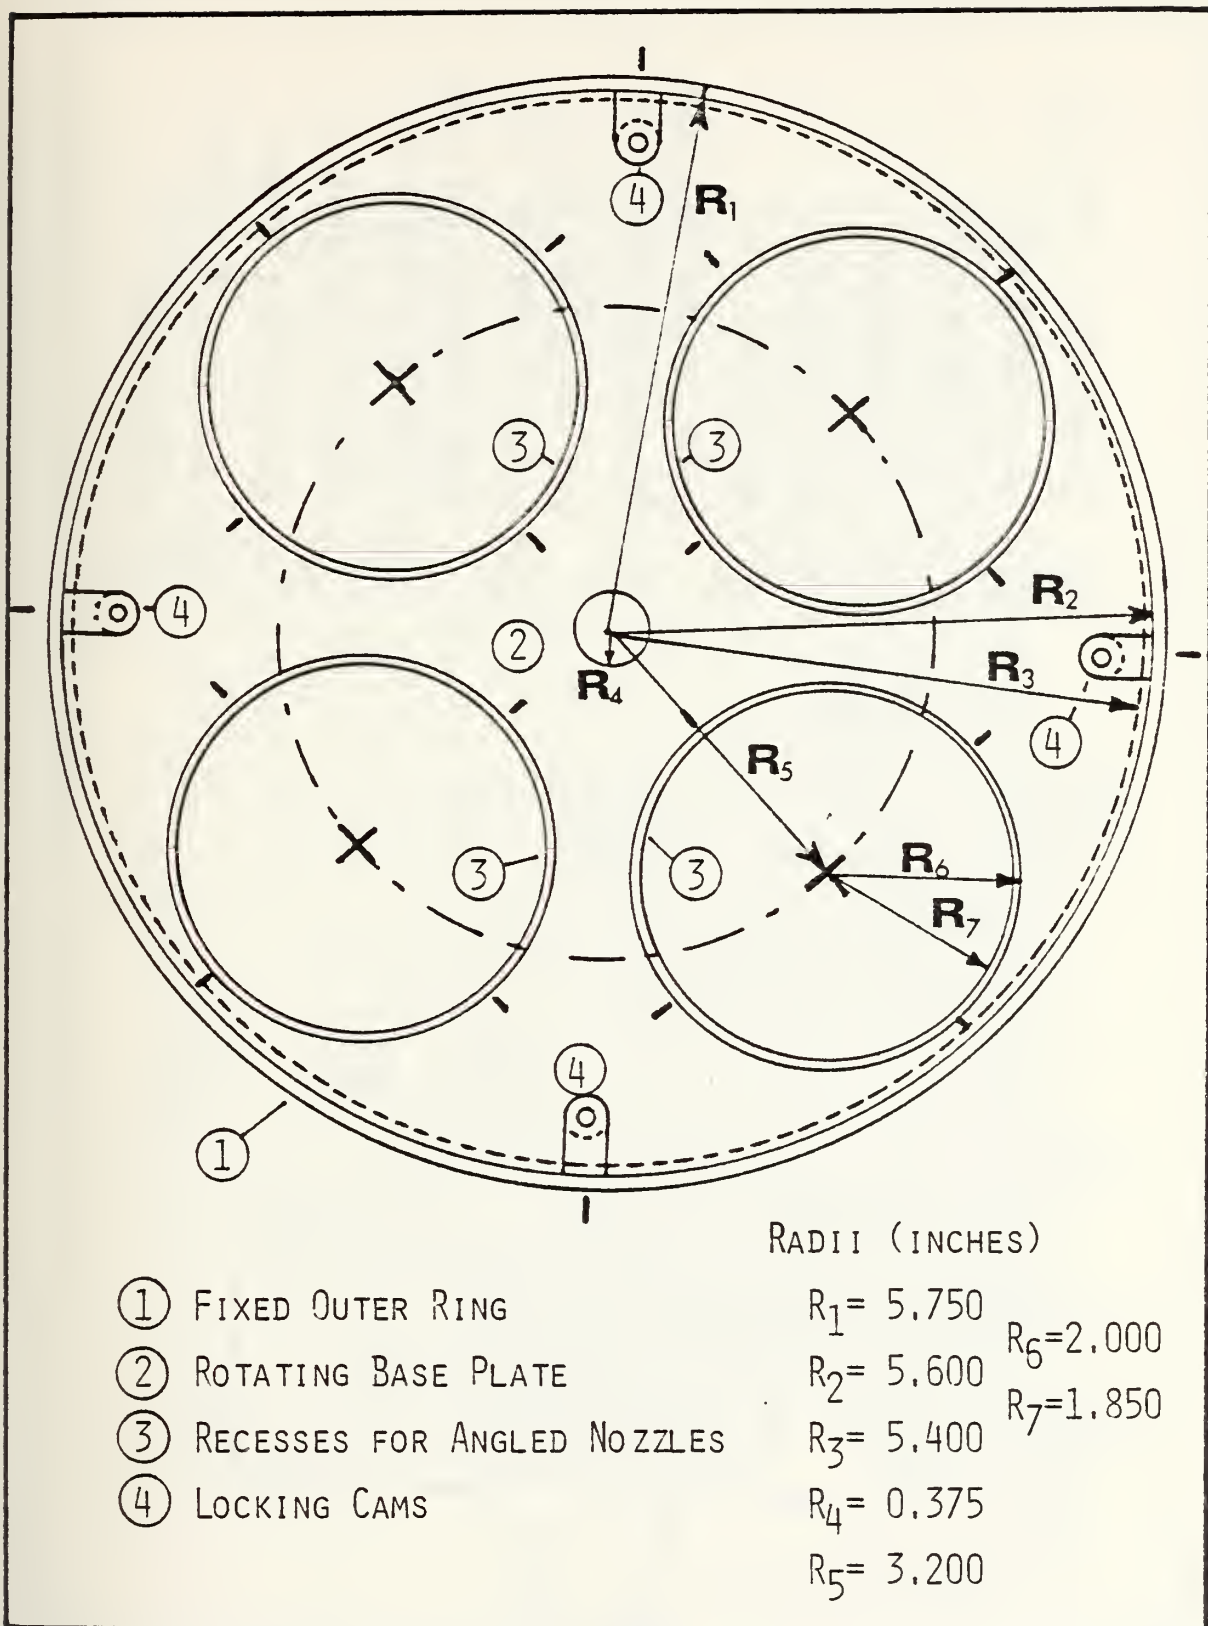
Dimensions for the Rotatable Nozzle Base Plate
